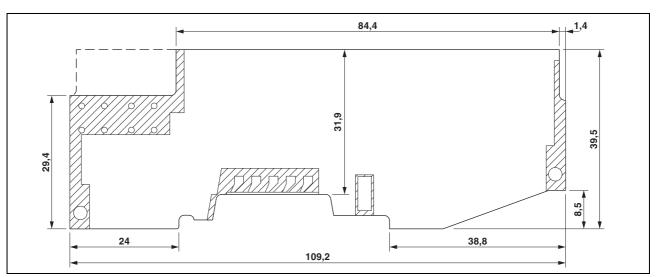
Maximum dimensions of the vertical low PCB of the 10U L lower housing part with the use of the DIN rail connector, with 8U and 10U housing cover
